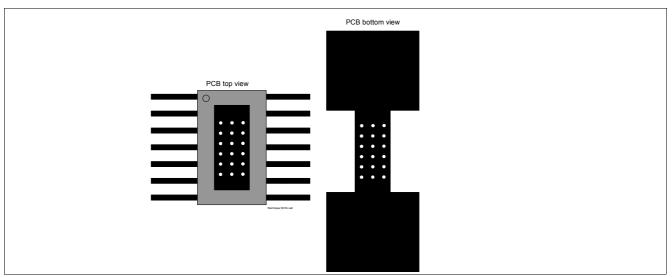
PC Board Top and Bottom View for Thermal Simulation with 600 mm² Cooling Area
